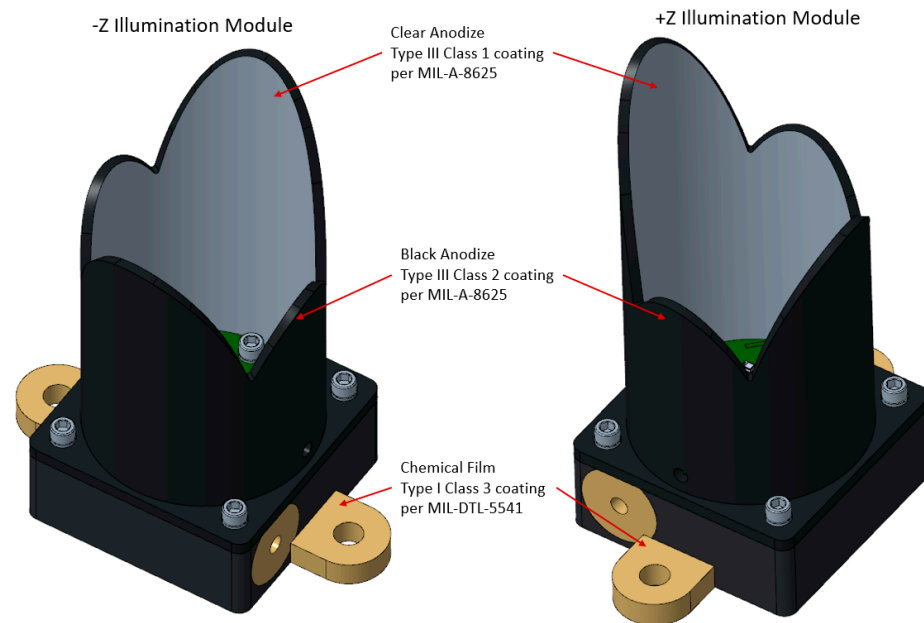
Mechanical design with coating specifications, showing two unique baffle designs and one common base design for each module.
